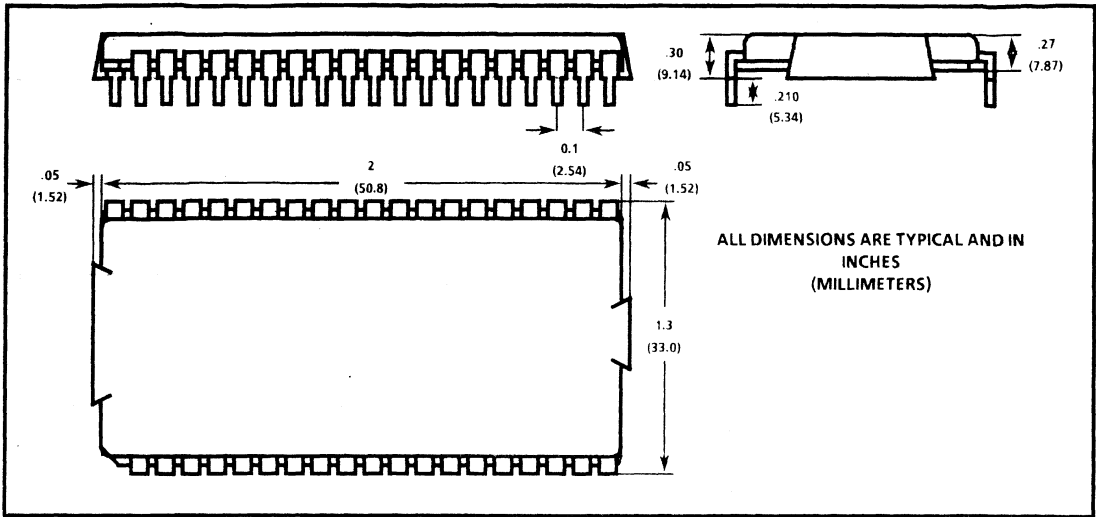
Physical Dimensions of 40 Pin Dual in Line Hybrid Package
